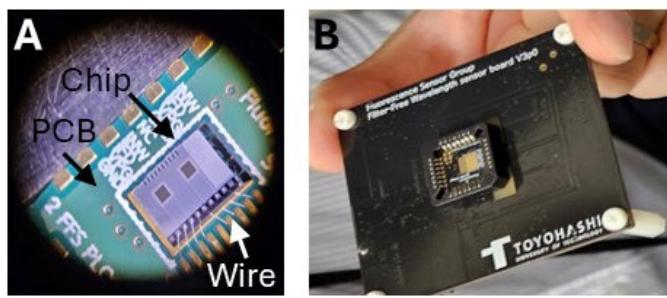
CMOS sensor. (A) A chip of two sensors wire-bonded to PCB. (B) Full sensor PCB.
